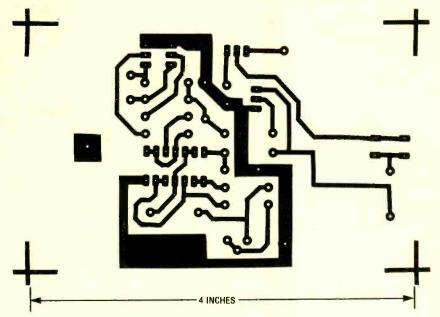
You can make your own printed-circuit board from this foil pattern.
